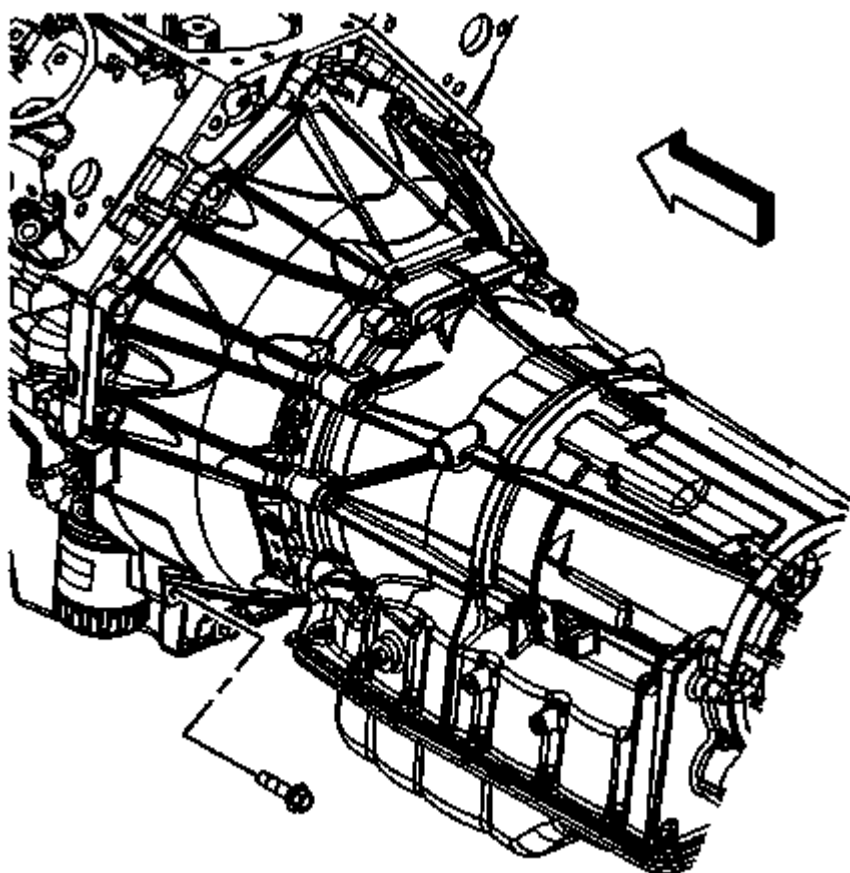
Removing The Clutch Housing Bolts/Studs
